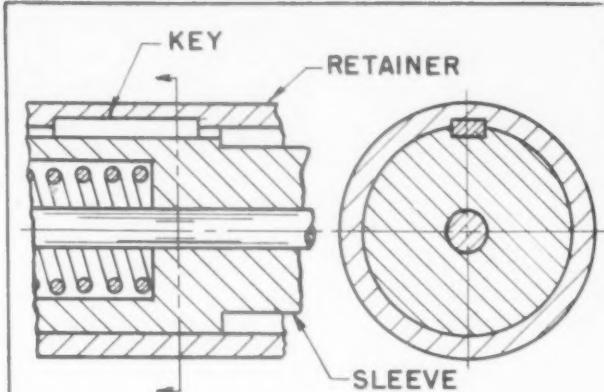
KEY METHOD OF PREVENTING SLEEVE ROTATION
